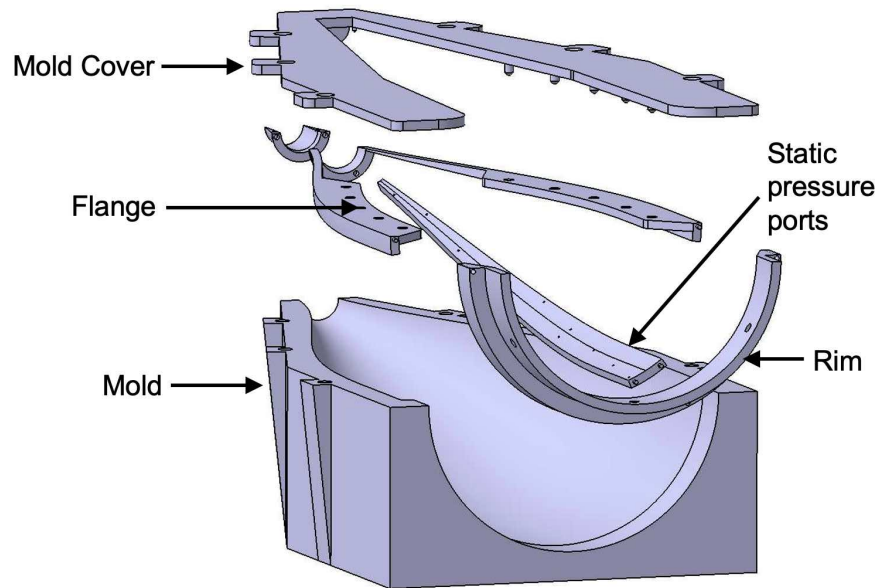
Exploded view of how the 3D-printed skeleton was inserted into the mold.
